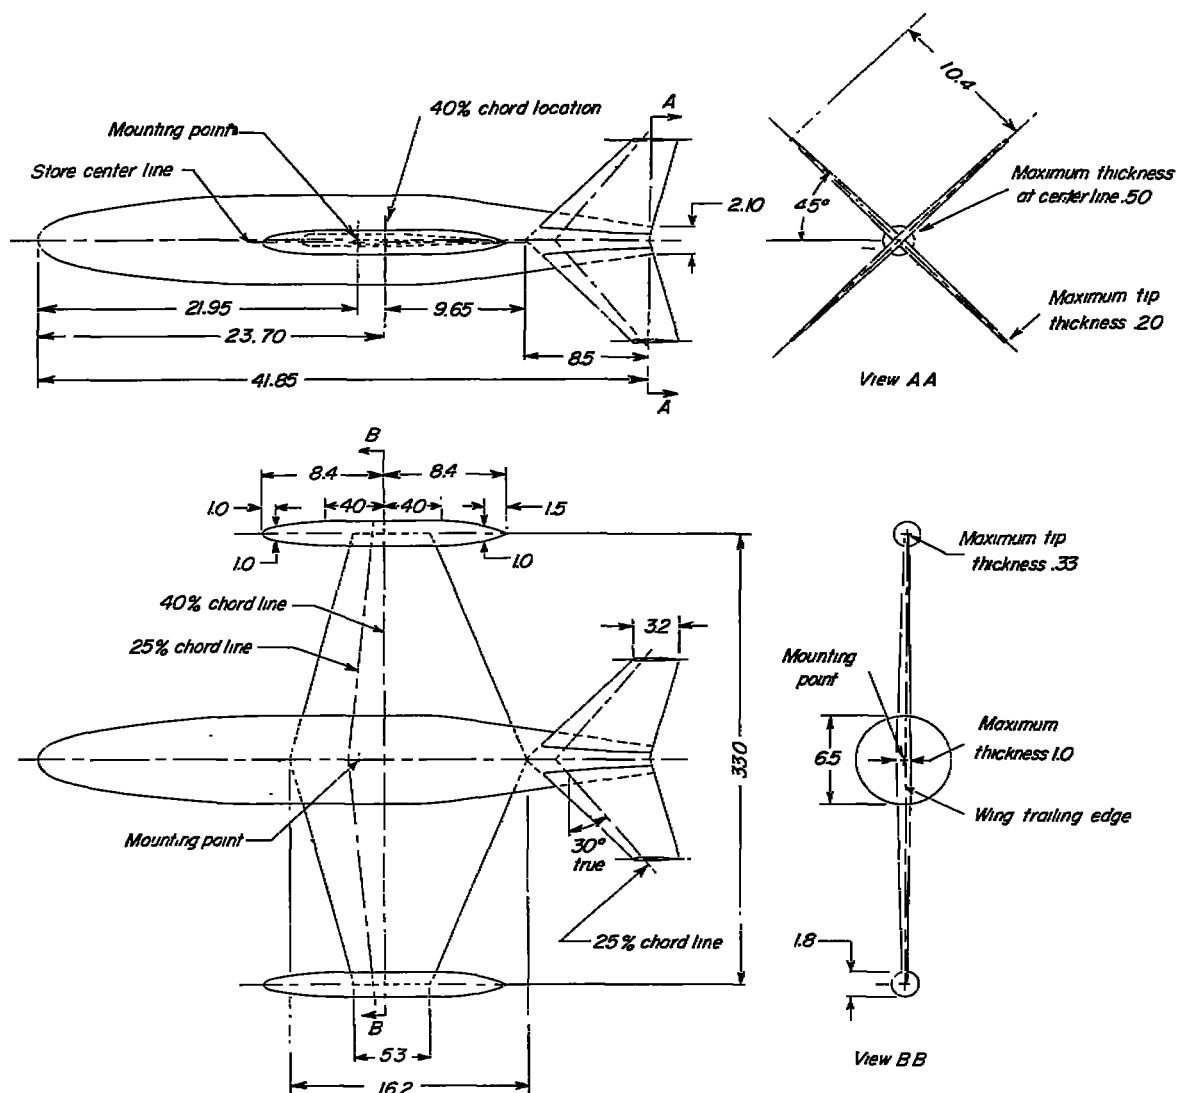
A drawing of the complete X-tail model. All dimensions are in inches.
